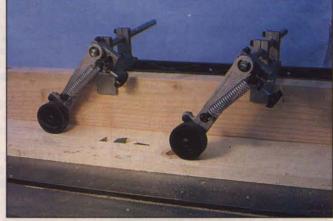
Photo F: Leichtung hold-downs simply clamp to wood auxiliary fence, making them easy to reposition or remove. Infeed wheel rides to left of cut line, as shown.
